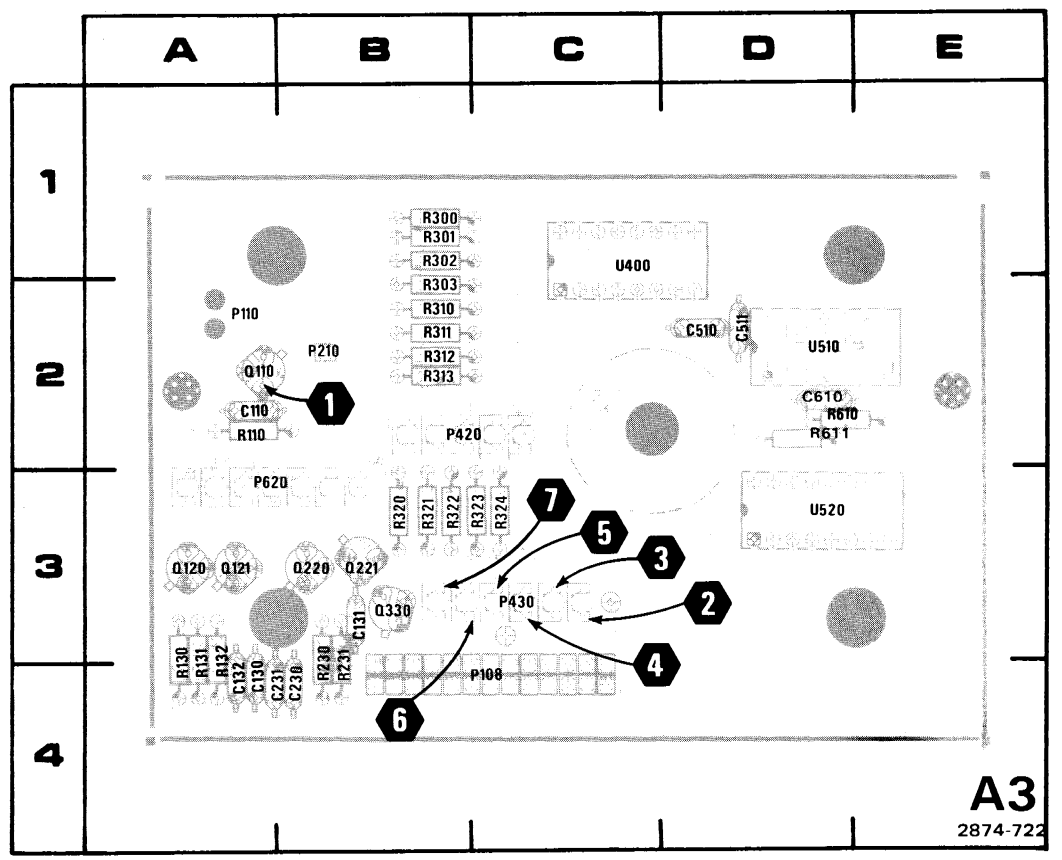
A3—Front Panel Keyboard Electronics circuit board assembly.
